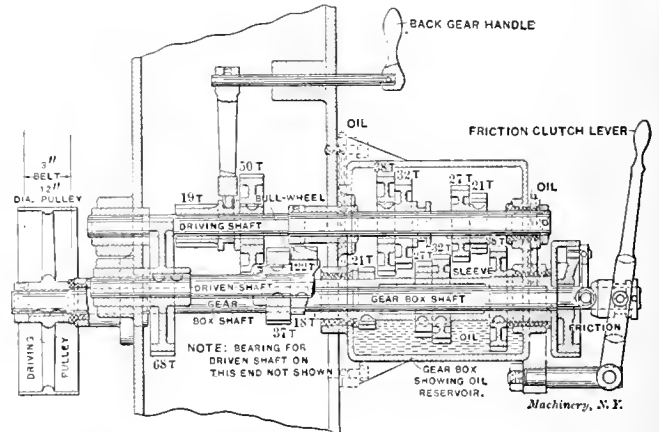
Longitudinal Section through Driving Mechanism, showing Arrangement of Gearing.
